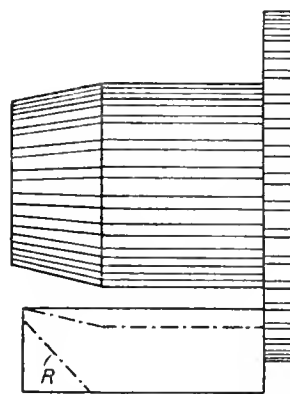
METHOD OF FORMING THE TEETH IN THE FRANCIS MILLING CUTTER
